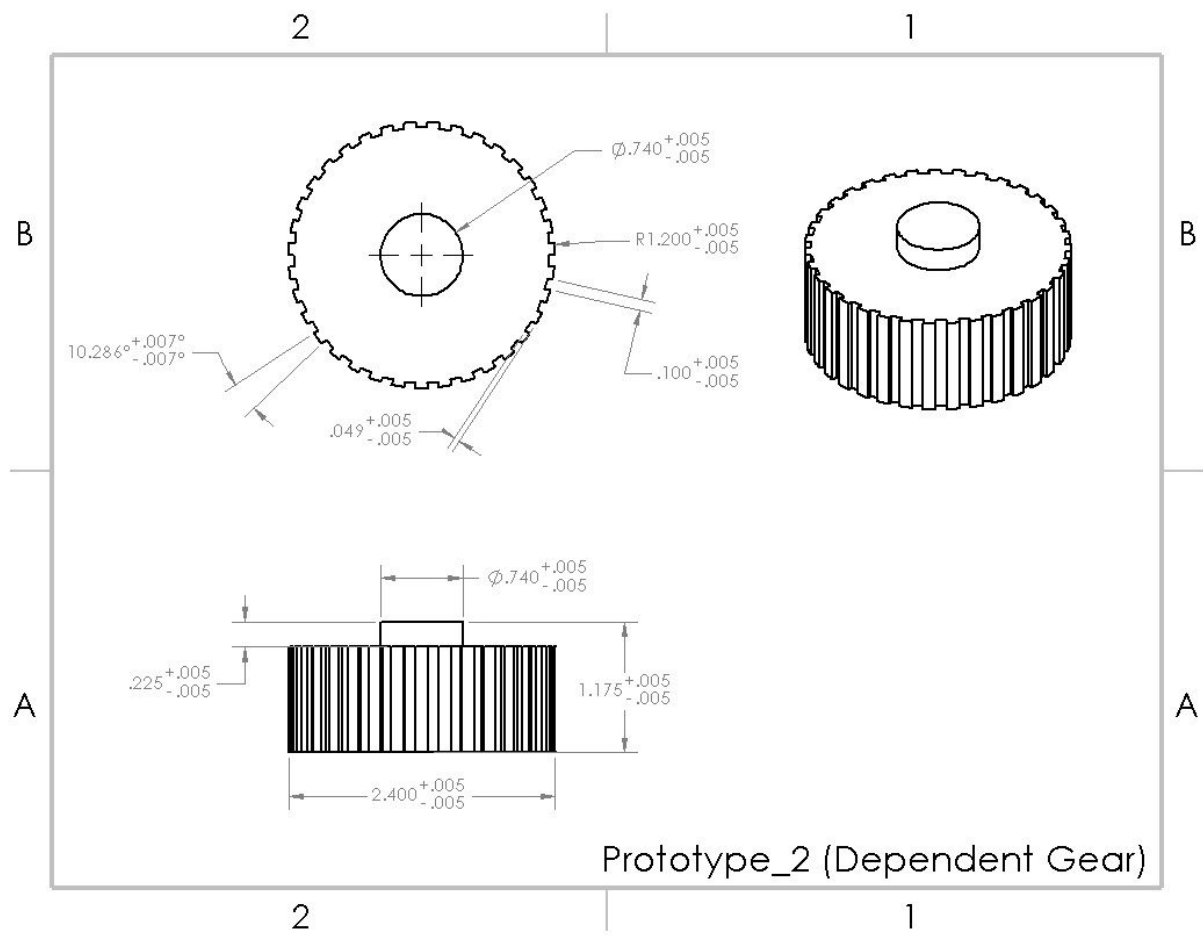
Solidworks 2D Prototype Dependent Gear Drawing
